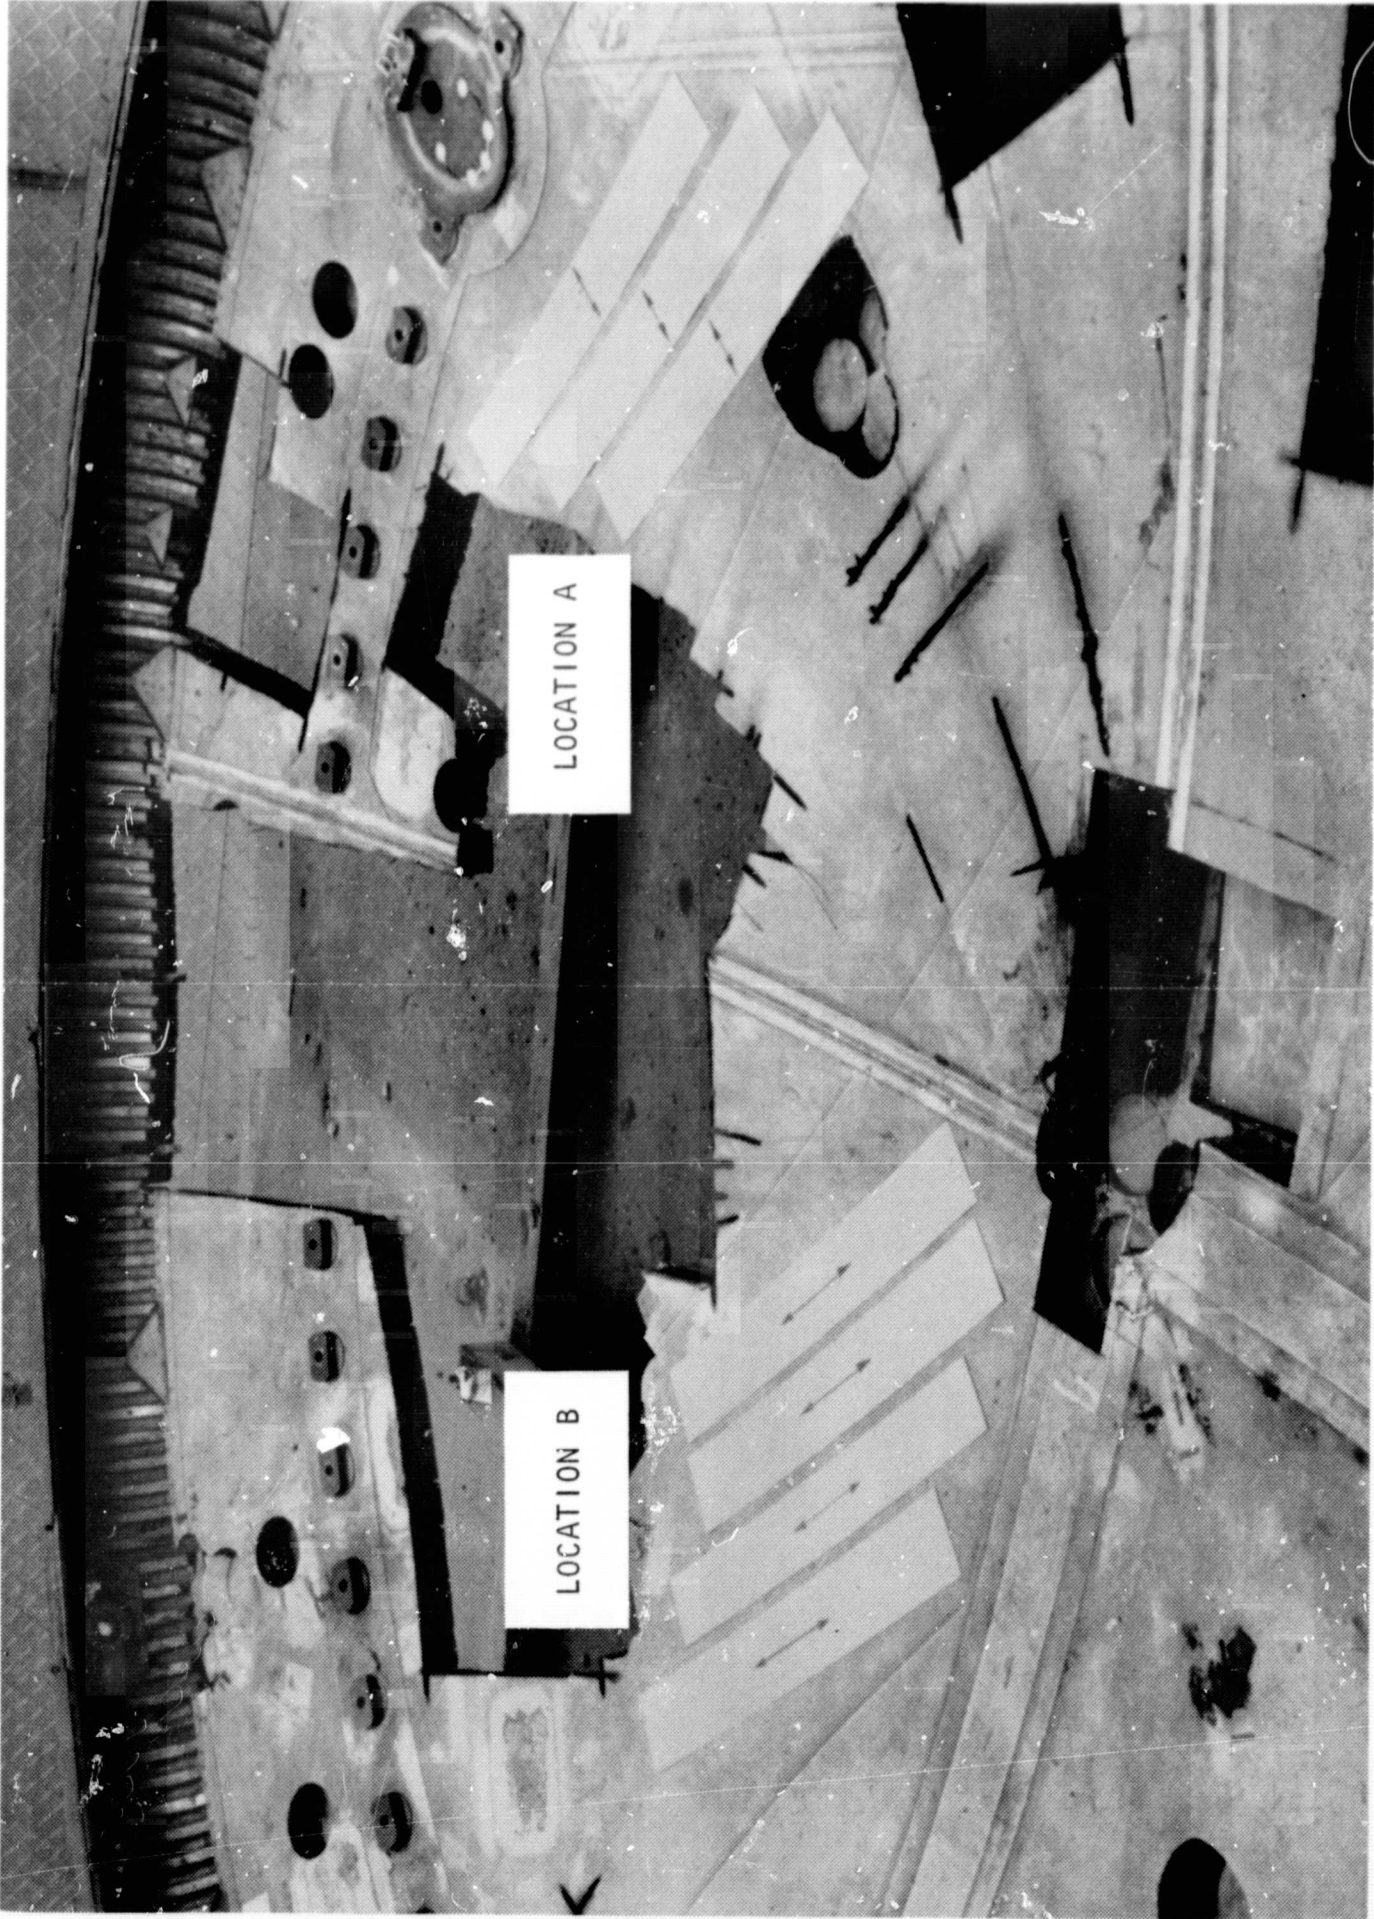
Apollo heat shield (spacecraft 011) specific specimen locations.
